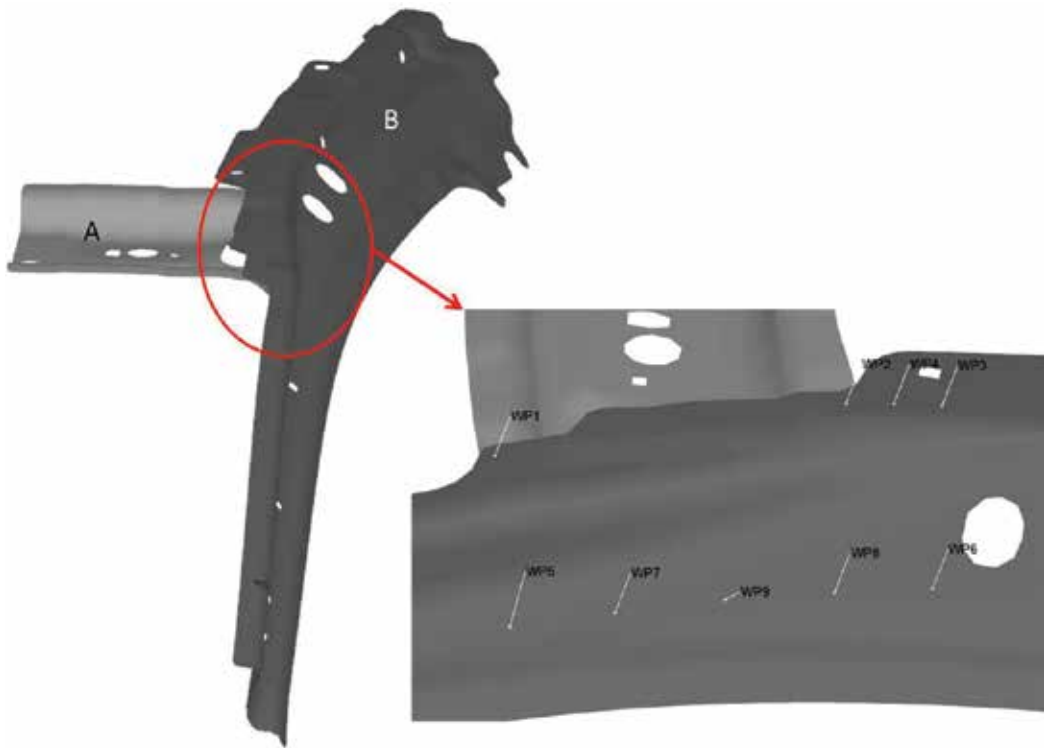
An A-pillar assembly. The two parts are joined by nine spot welds.
